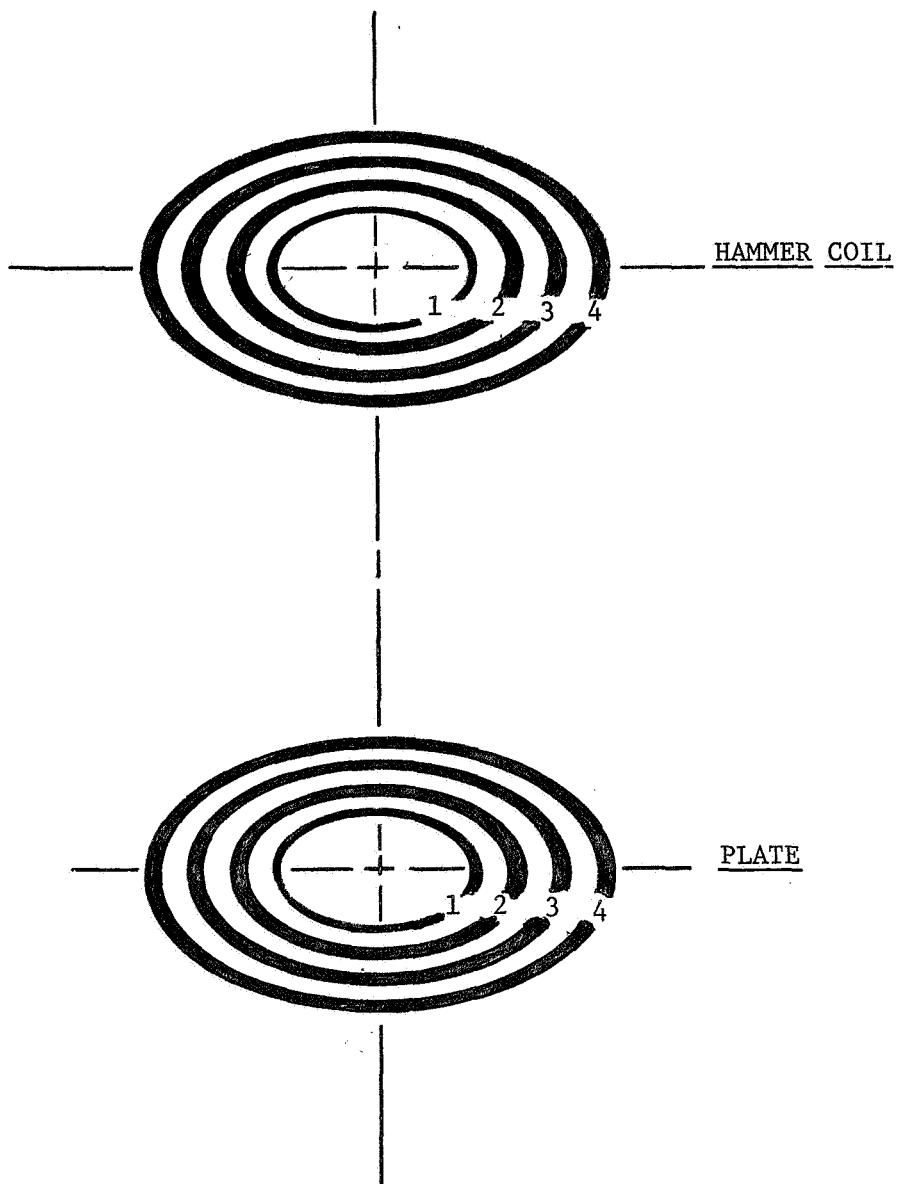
An Illustration of a Four Ring Hammer Coil and Plate Assembly.
